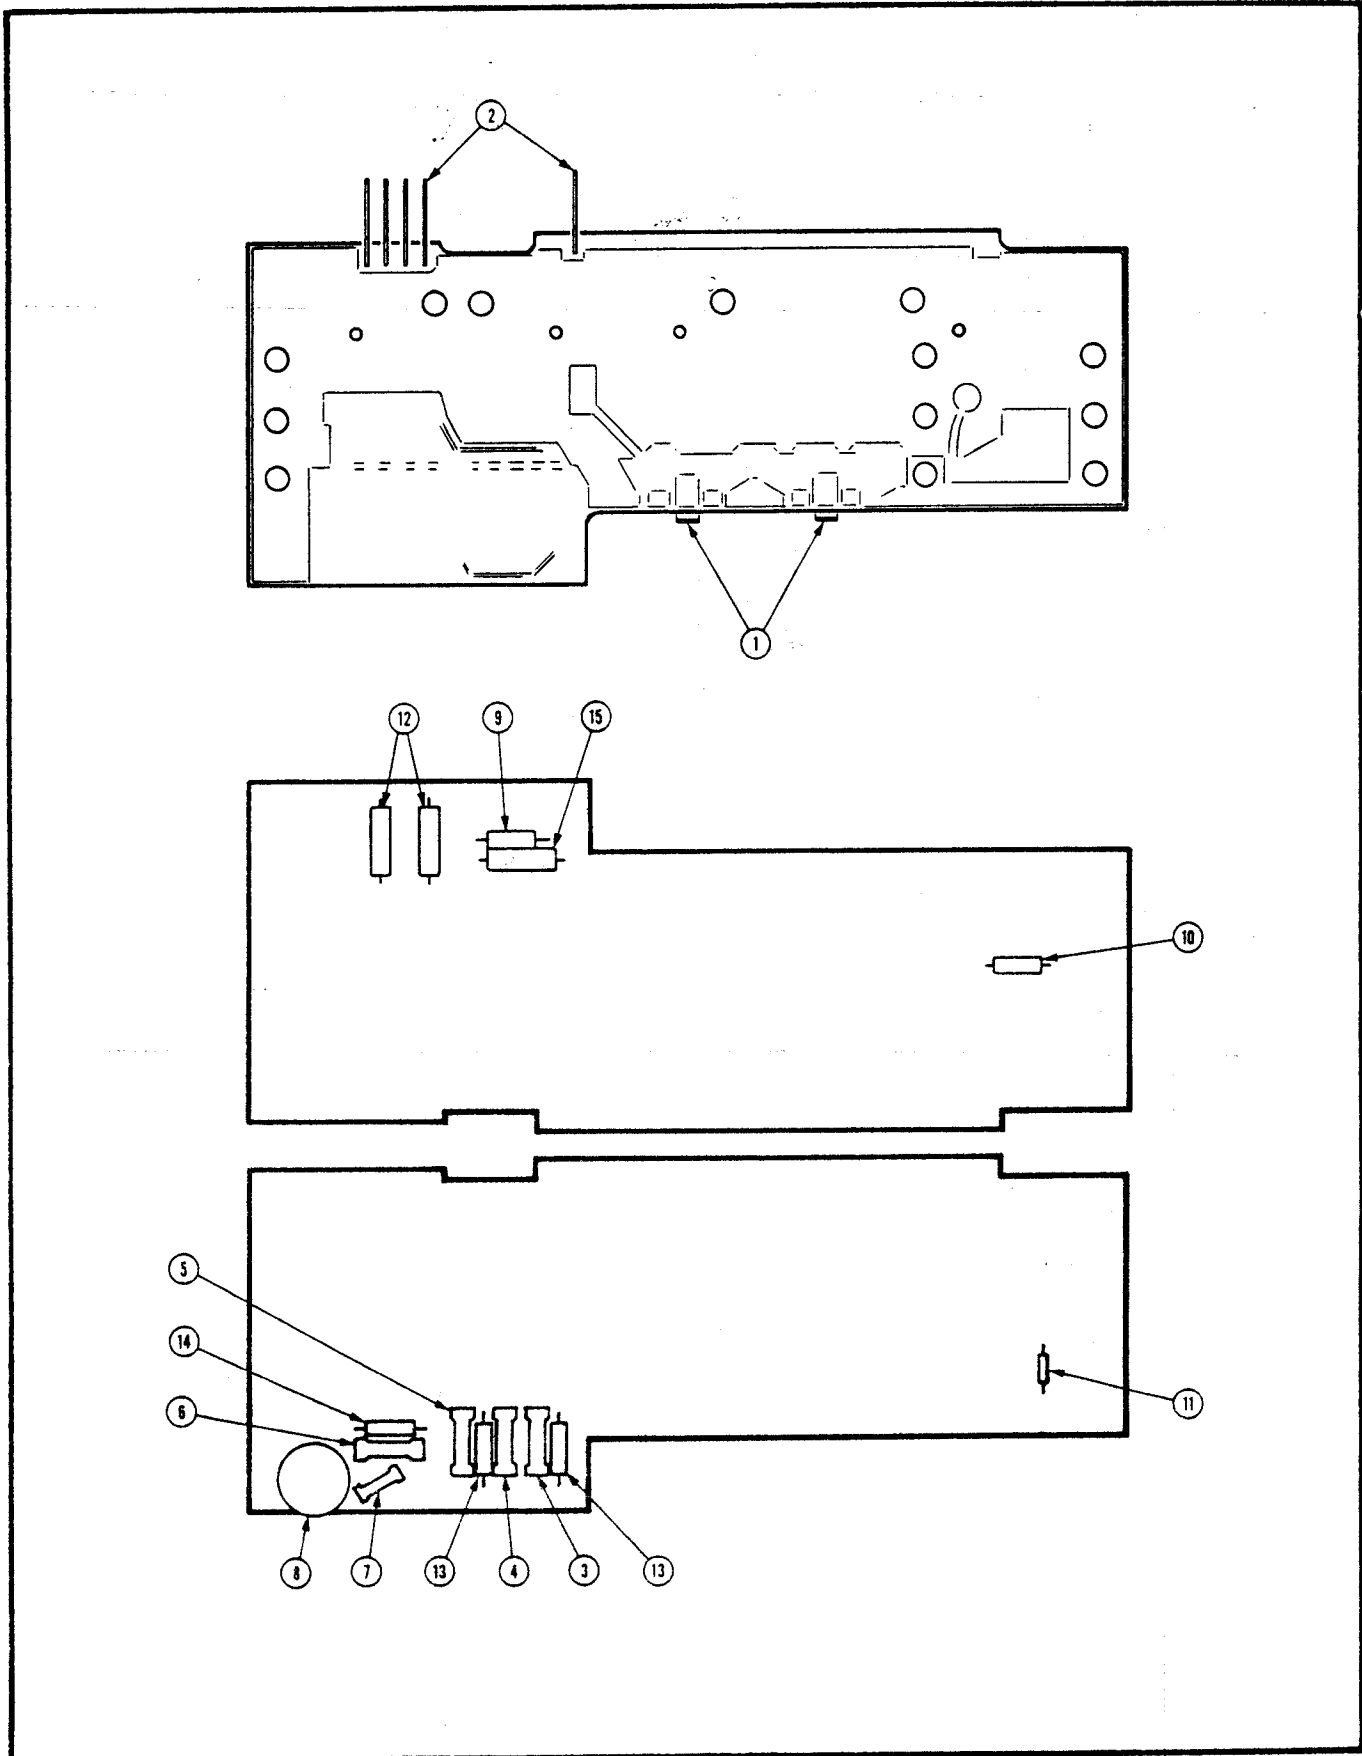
A1 Circuit Board Assembly, Cam Switch, Channel 1 (sheet 1 of 2).
